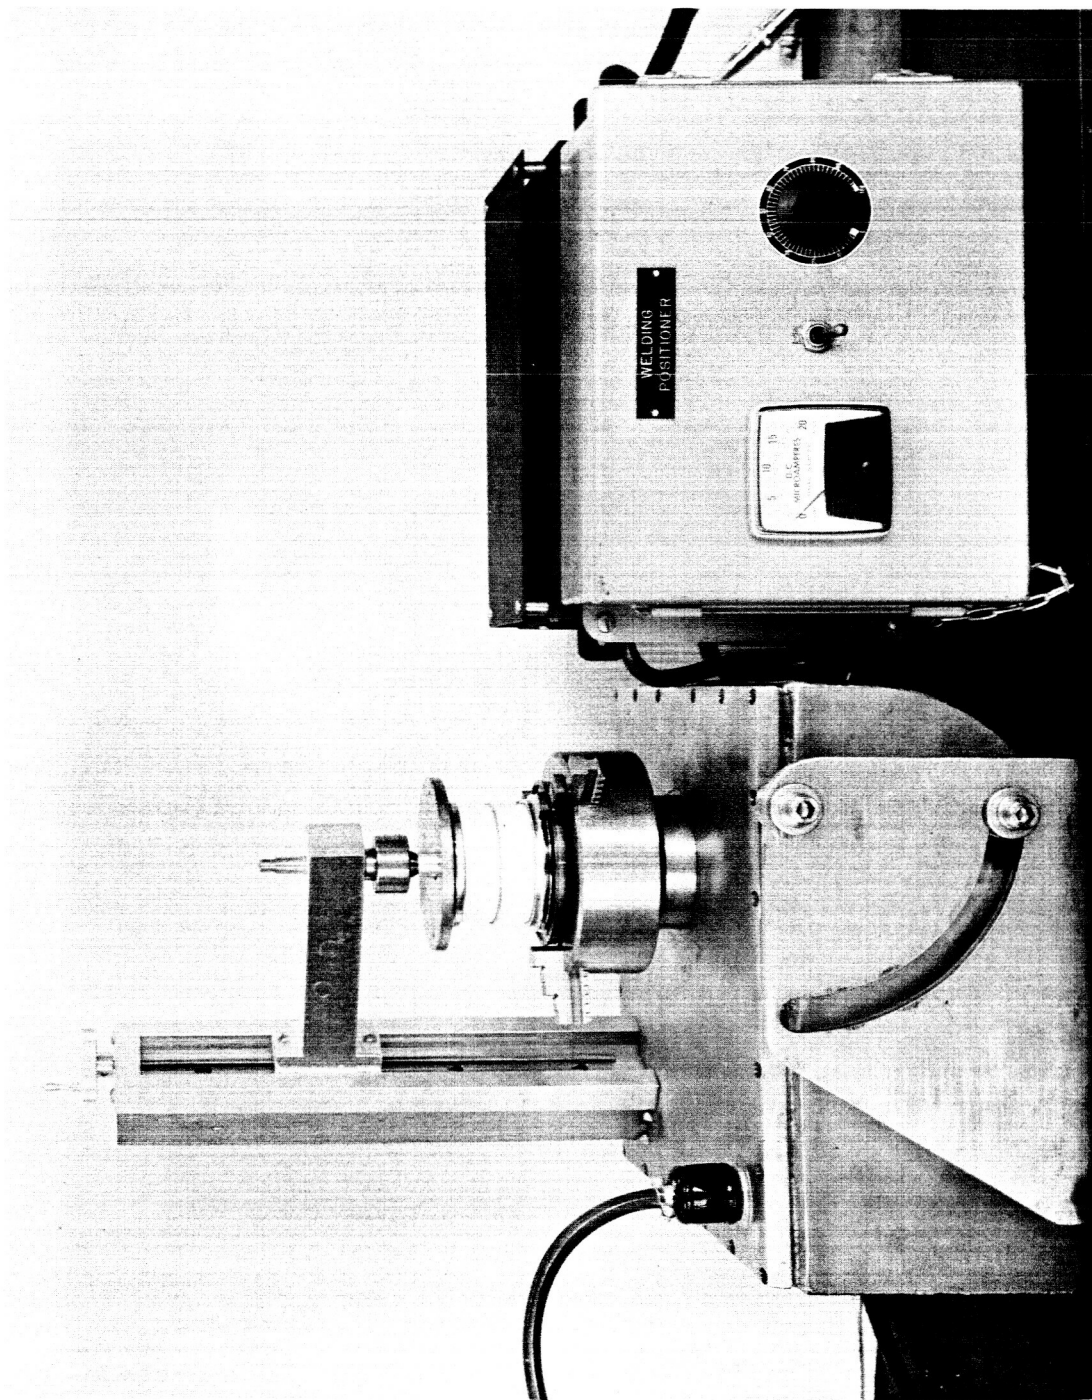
Rotating Fixture for Welding of the Three Seams in the Vacuum Capsule.
